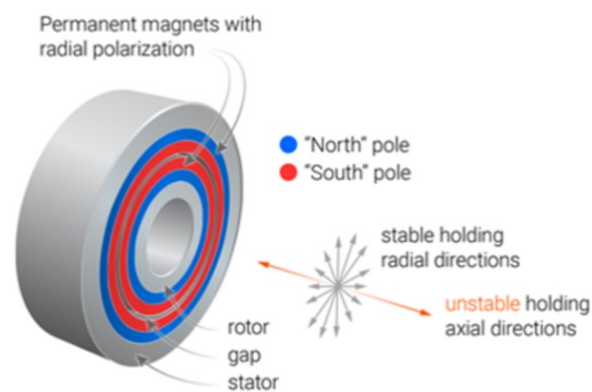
Passive magnetic bearing with permanent magnets [51]
